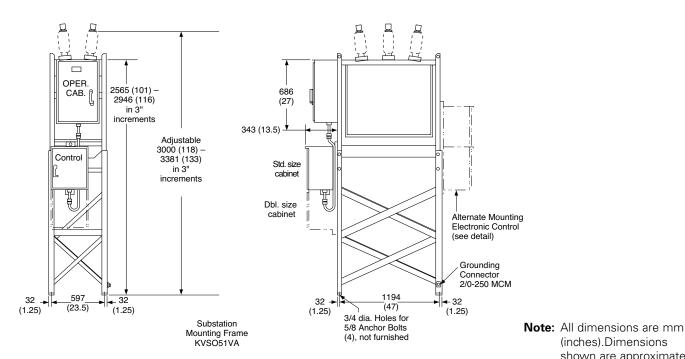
Outline dimensions with substation mounting frame accessory (recloser and mounting frame only)
